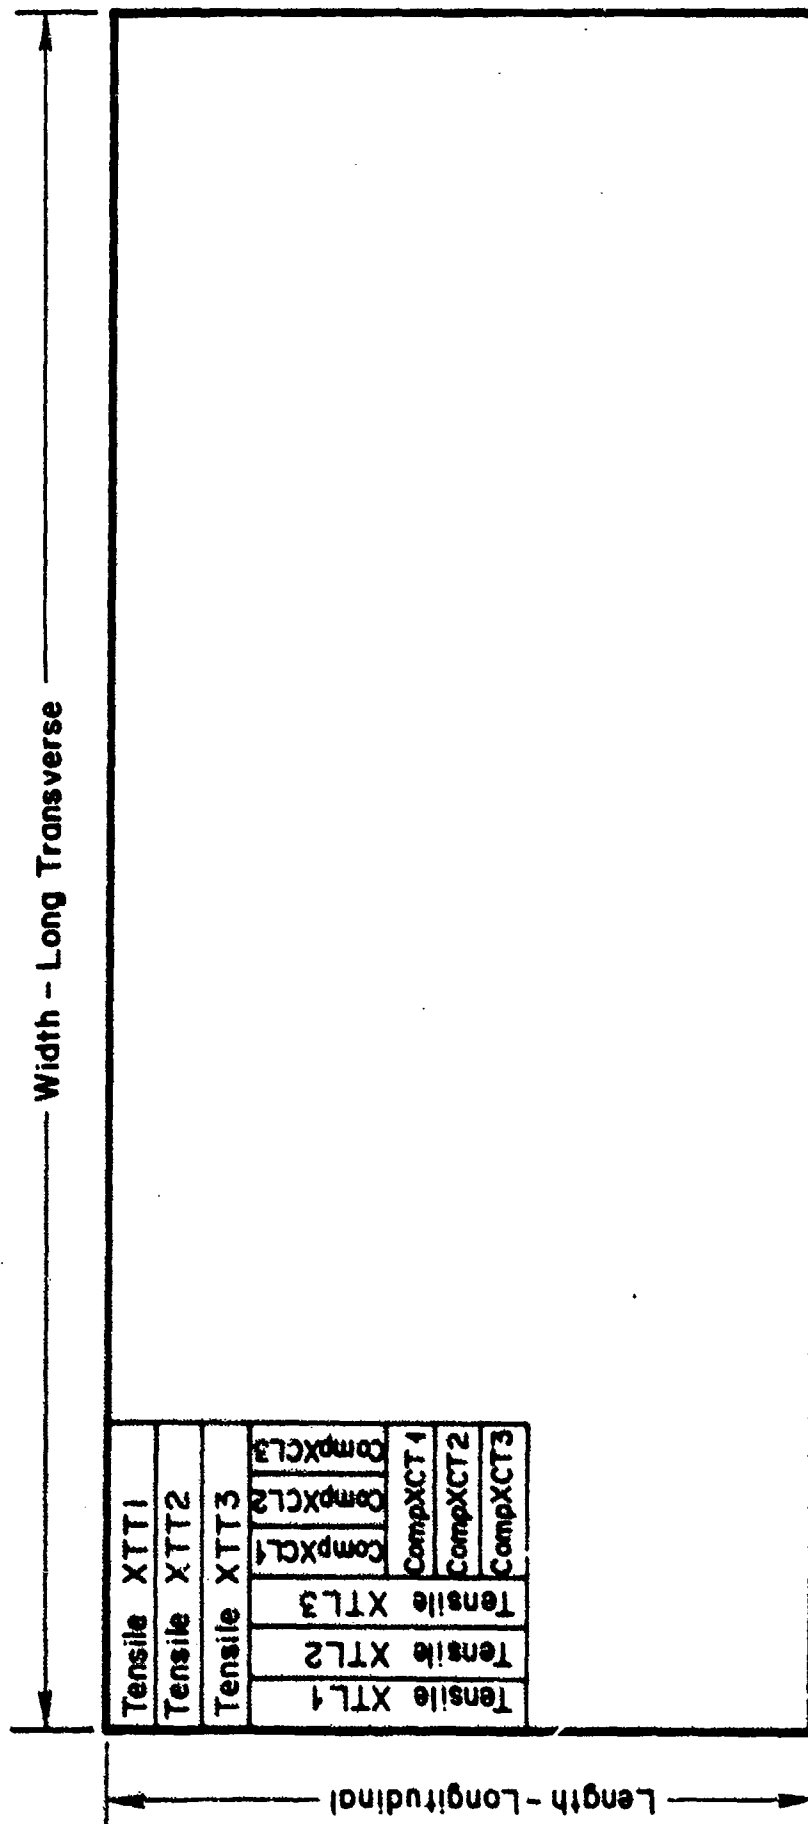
Location of test specimens for Ti-15V-3Cr-3Sn-3Al sheet-- 0.021 (P6562), and 0.023 (S8373) inches thick.
